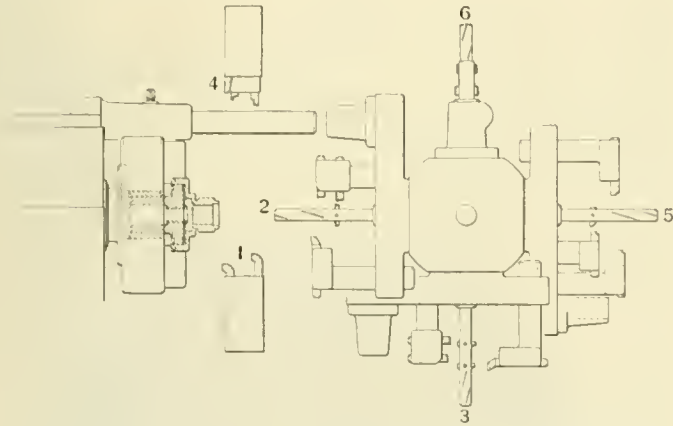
Method of Tooling Automatic for Machining Clutch Gear
